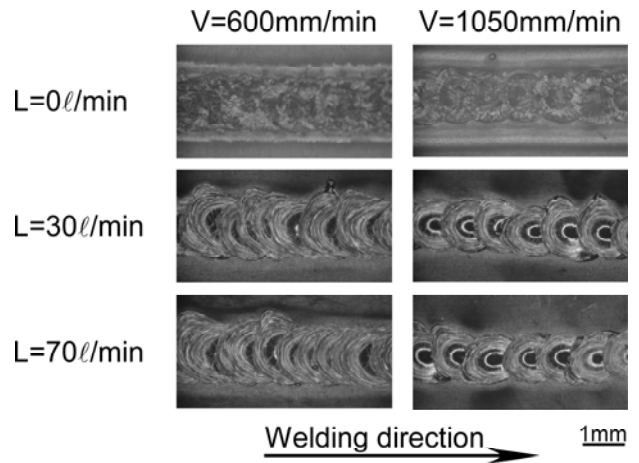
Appearances of weld bead. (Surface bead)
